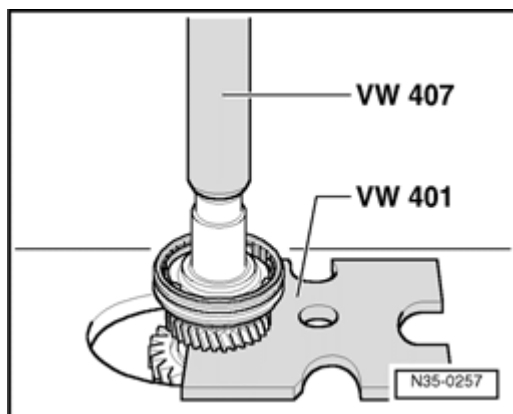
Pressing off 5th and 6th gear synchrohub/locking collar with 6th gear
